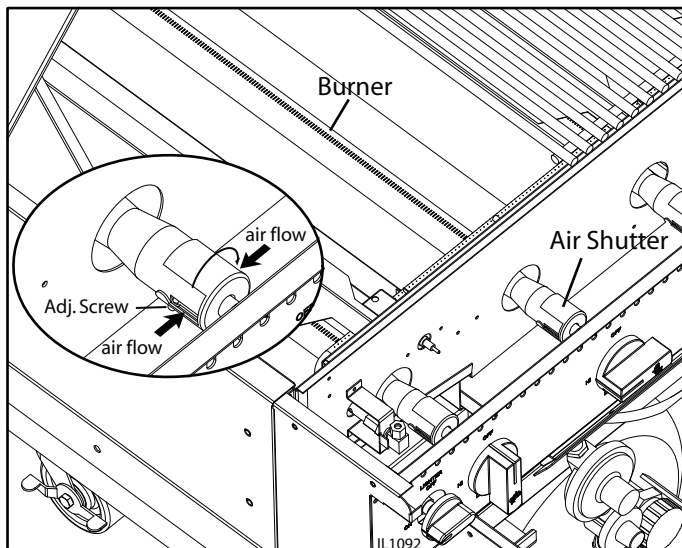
, Adjusting the Burner Air Shutter to obtain proper flame.
